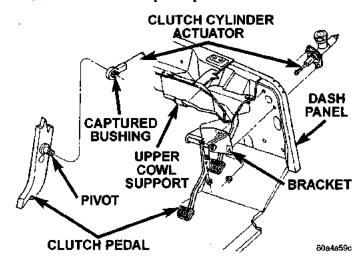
Clutch Pedal Mounting—Right Hand Drive
